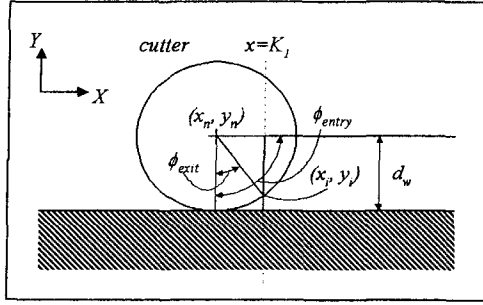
Entry and exit angles of a cutter when a cutter engages the workpiece.
